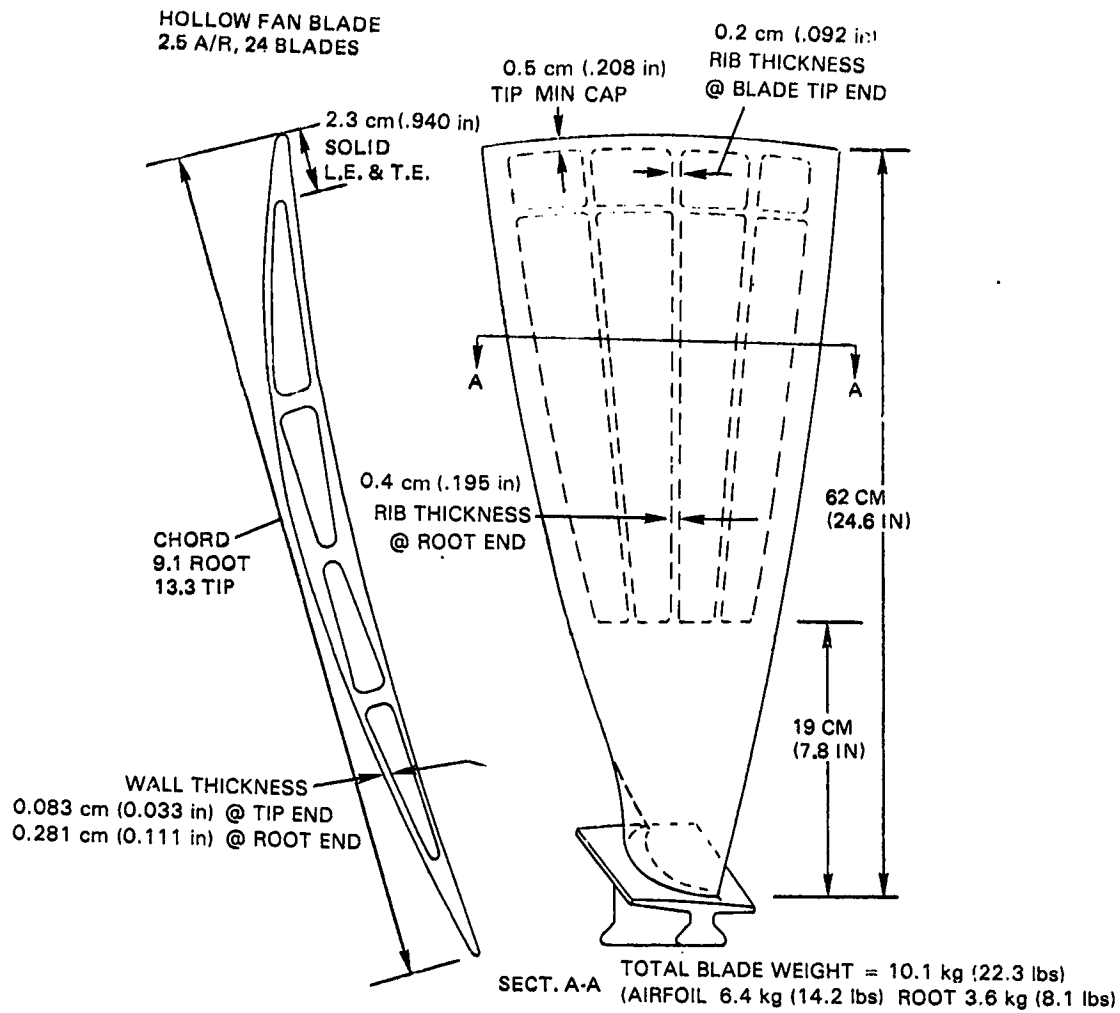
Shroudless Fan Blade Cross-Section
